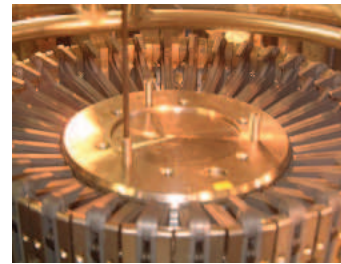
Lifting up disc by inserting jack-up screws
